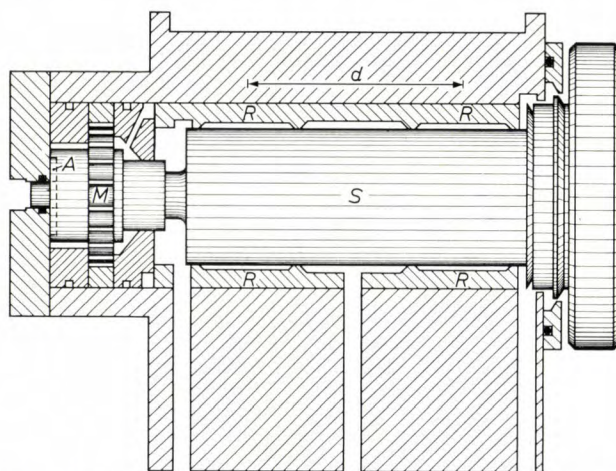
Cross-sectional drawing of headstock spindle S and vane motor M . A thrust bearing. R journal bearings.
